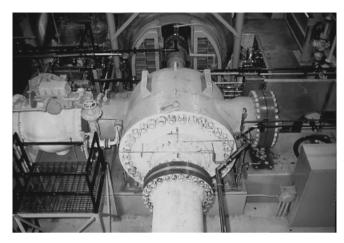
Axial inlet compressor being retrofitted with magnetic bearings. (*Revolve Technologies, Calgary, Alberta, Canada*)
